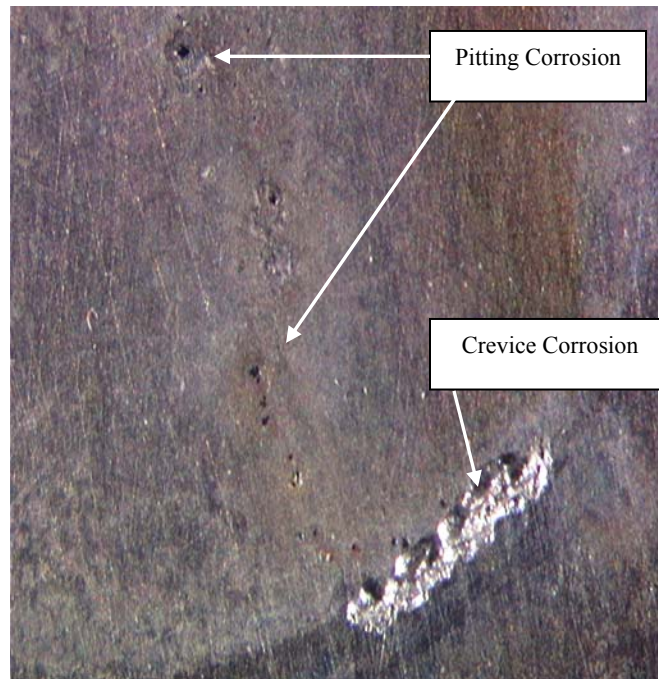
Pitting and crevice corrosion in 316SS disc in seawater at  $90^{\circ}\text{C}$  (specimen PEA564)
